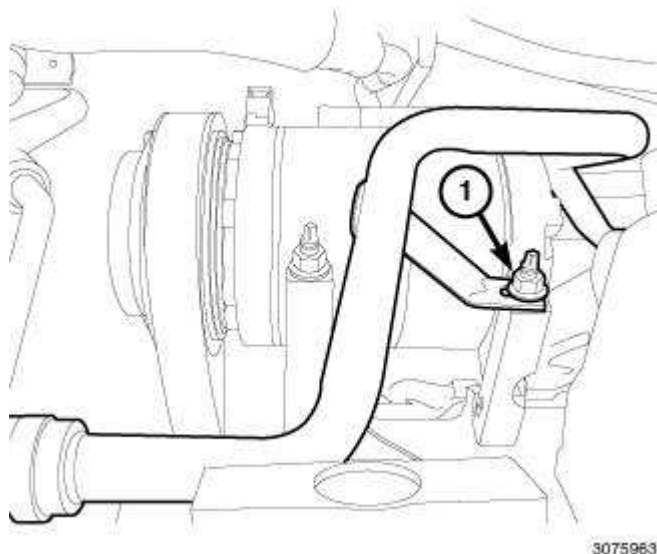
Heater Core Return Tube Lower Support Bracket Retaining Nut
